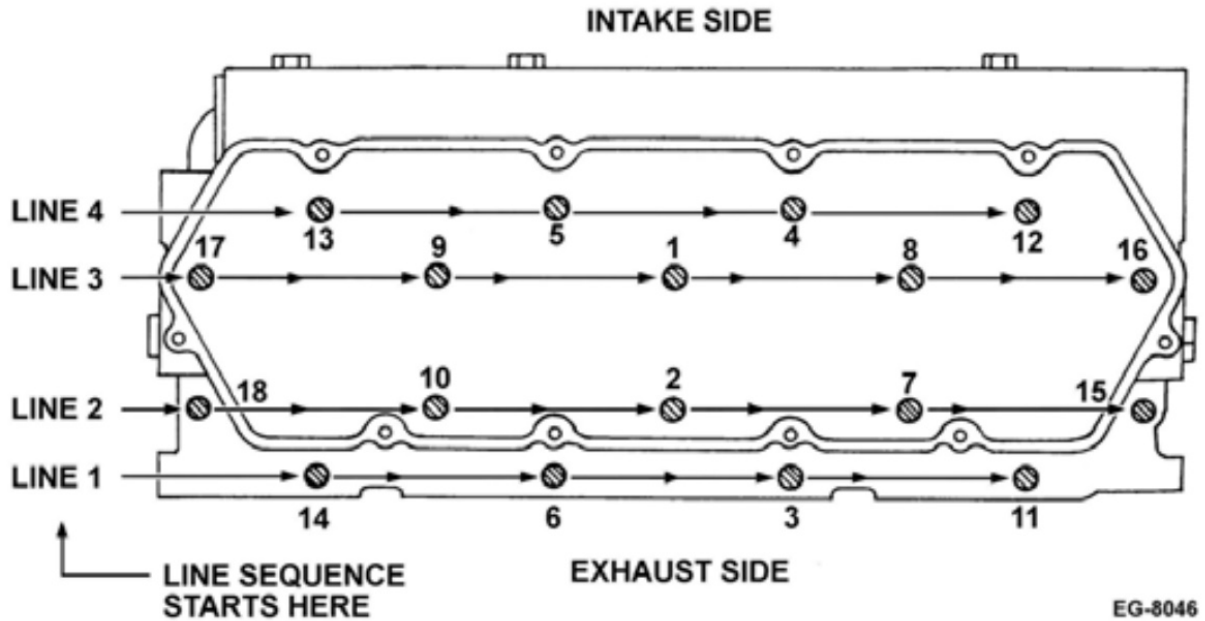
Cylinder Head Mounting Bolt Special Torque Sequence
